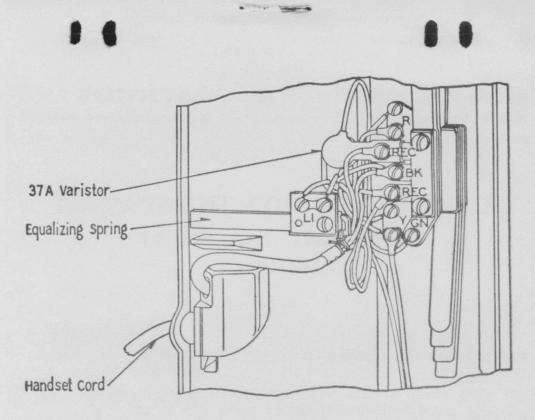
Type Coin Collectors-Backplate Assembly
